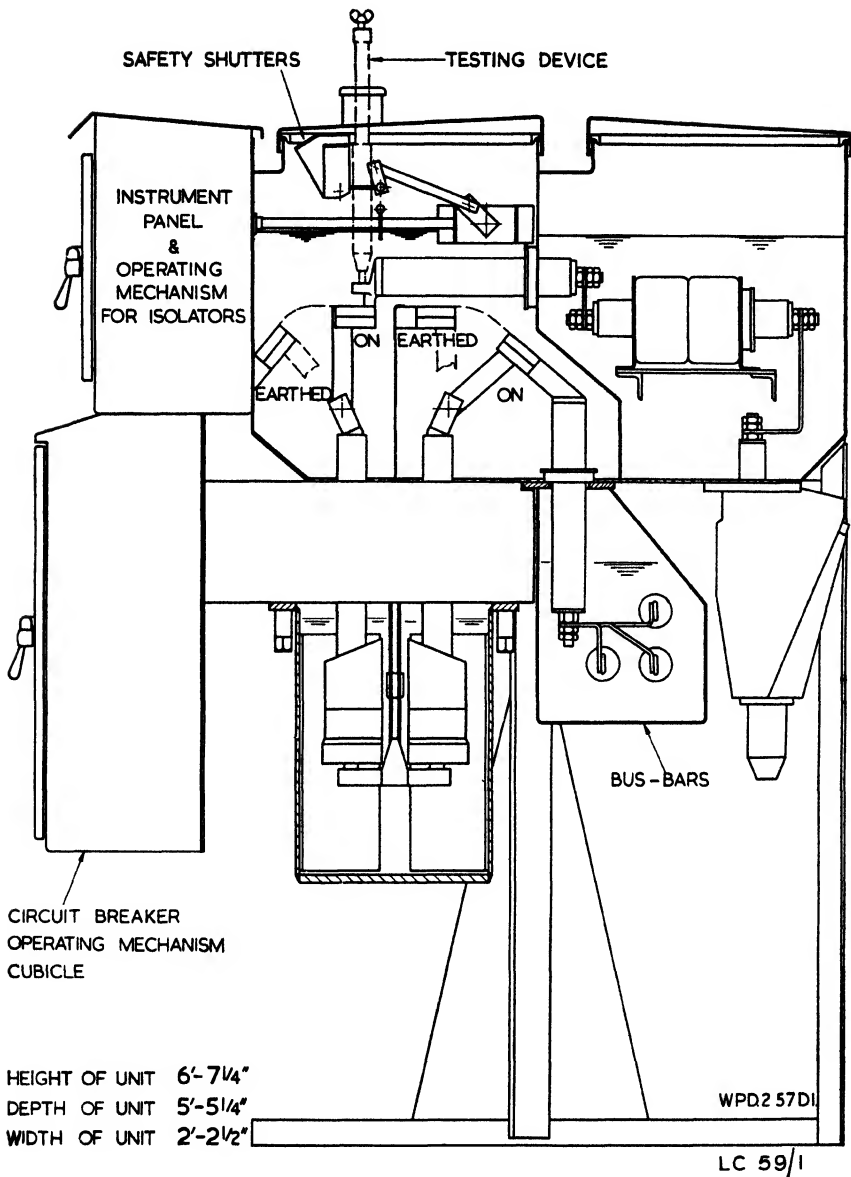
Cross-section of outdoor metalclad unit in Fig. 18-41.
